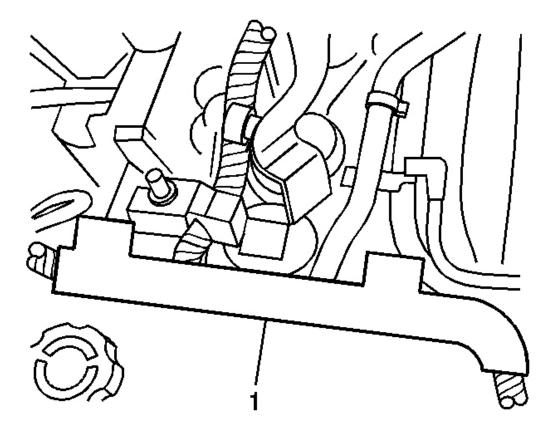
View Of Engine Electrical Harness Housing Courtesy of GENERAL MOTORS CORP.
